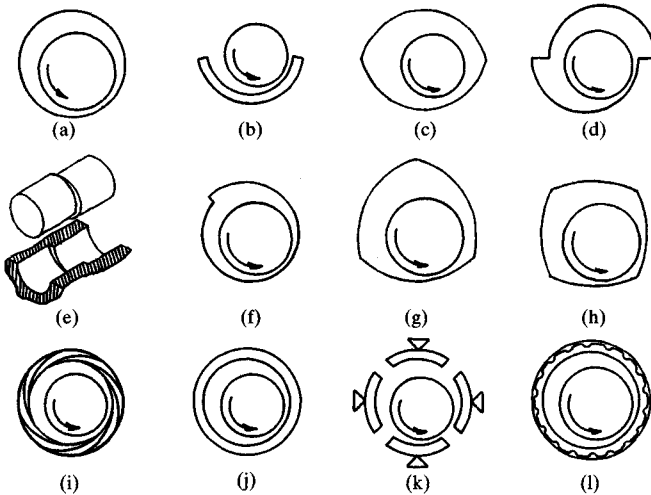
Journal bearing geometries. (a) Full bearing; (b) partial bearing; (c) elliptical, or lemon, bearing; (d) offset bearing; (e) rocking journal bearing; (f) pressure dam bearing; (g) three-lobe bearing; (h) four-lobe bearing; (i) multileaf bearing; (j) floating-ring bearing; (k) tilting- or pivoted-pad bearing; (l) foil bearing.
